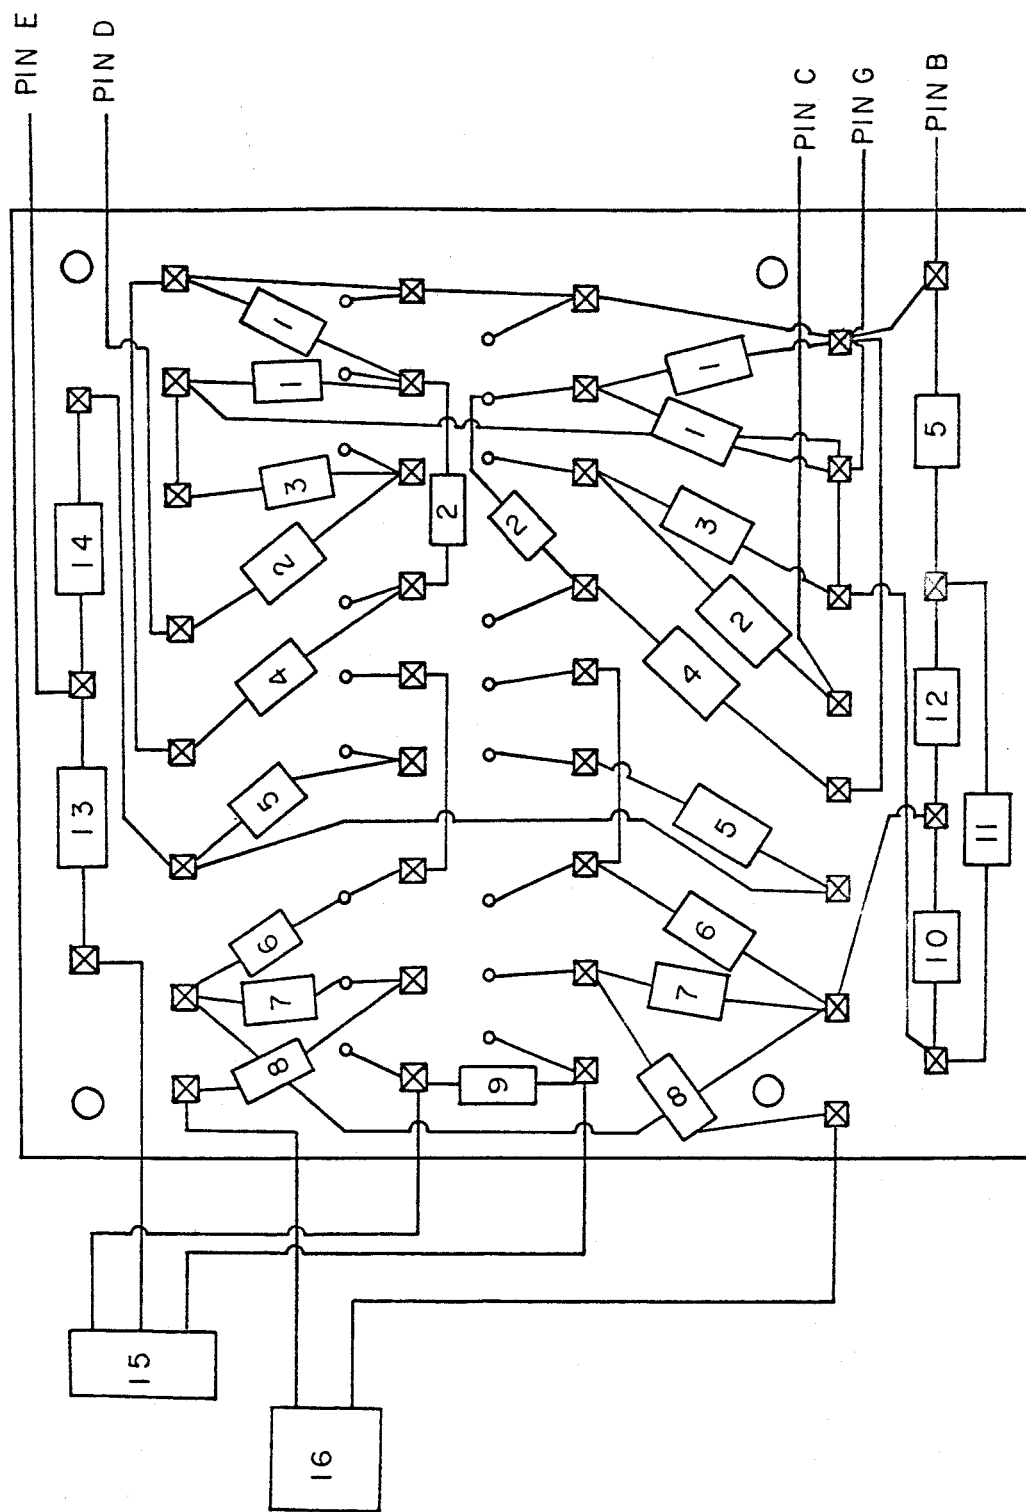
SONIC ANEMOMETER ASSEMBLY
